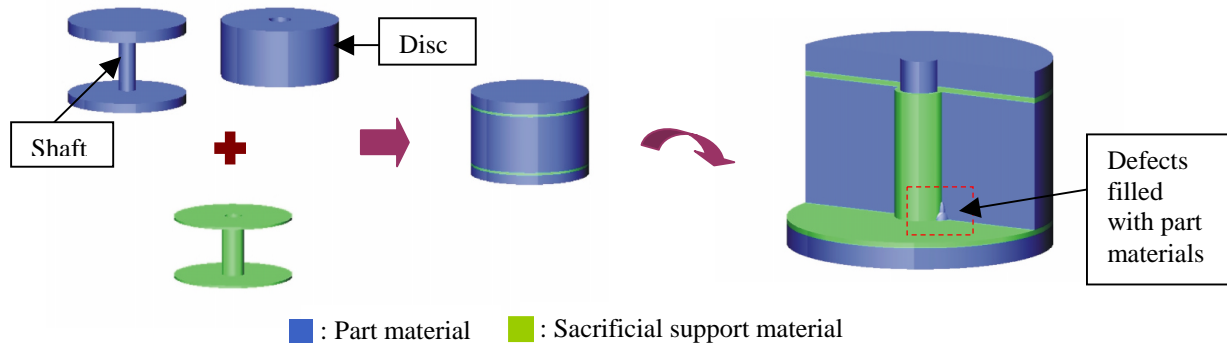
Voids due to incomplete filling and defects filled with part materials.
